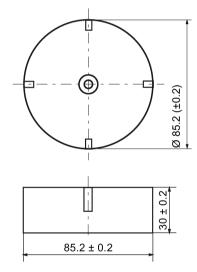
Dimension drawing of spacer 6GT2690-0AA00
